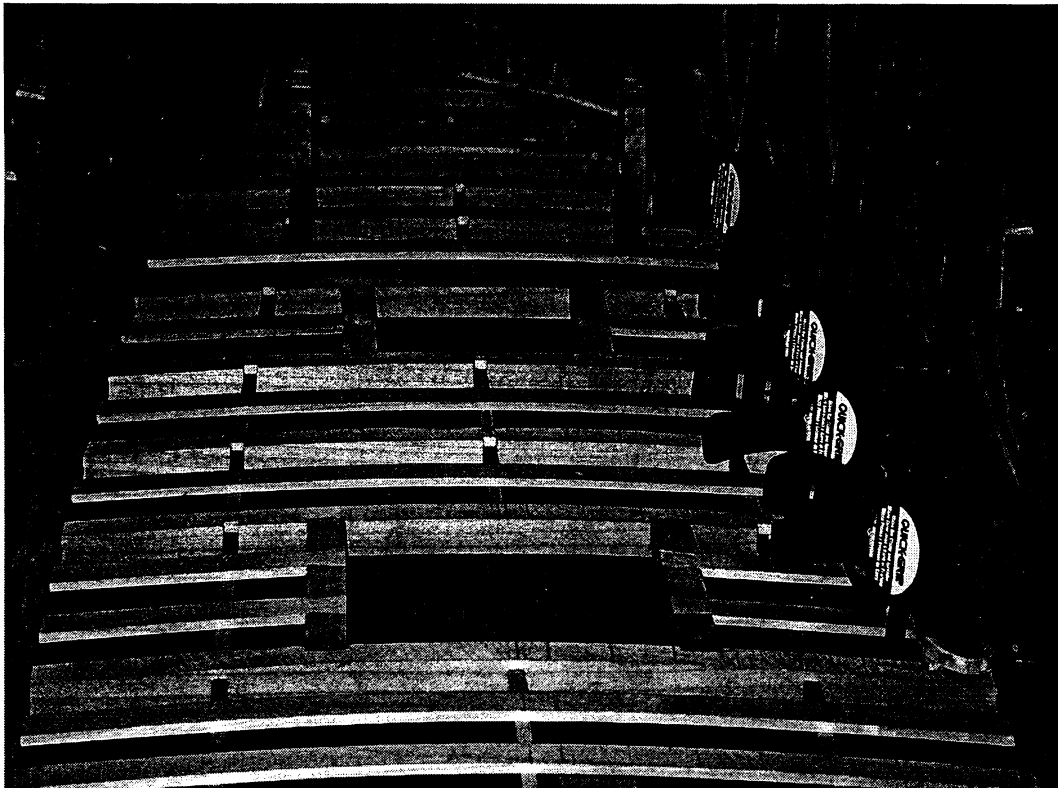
View of the completed deck framing looking forward. Photo by G. Grieco.
